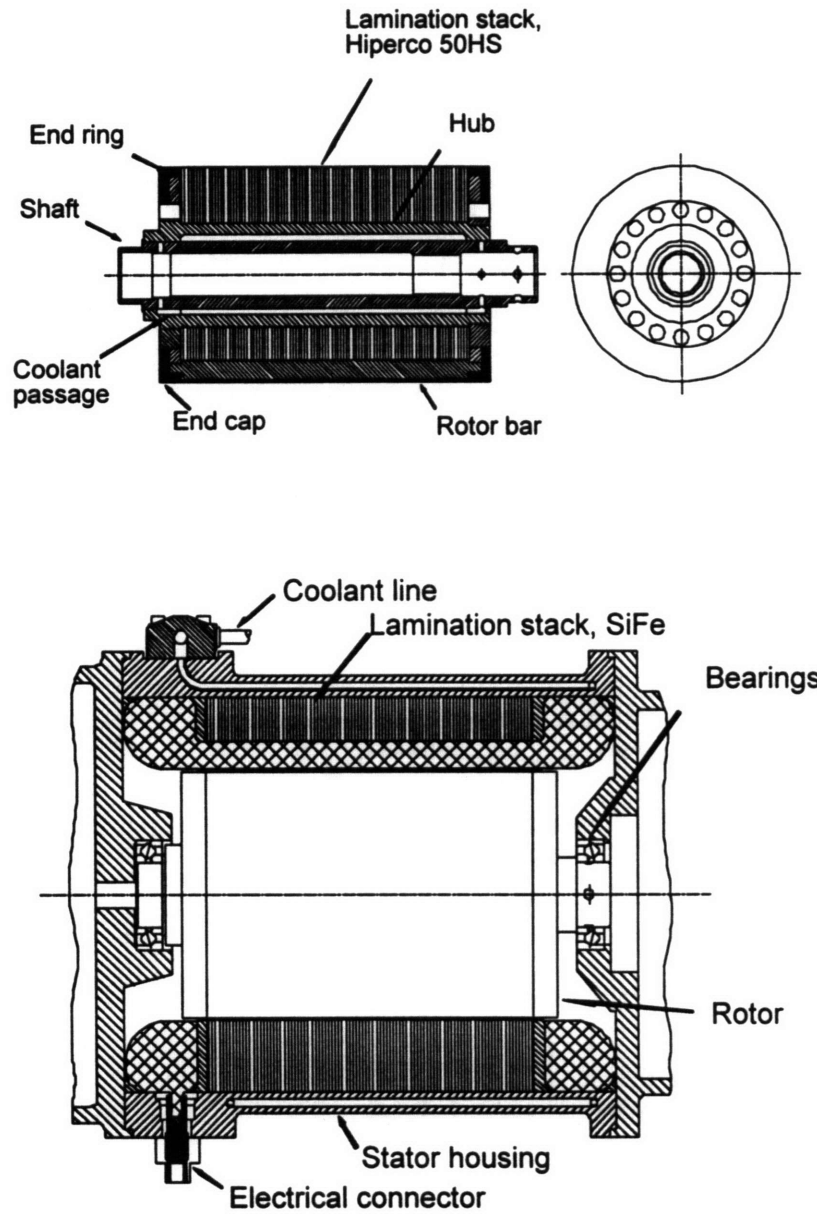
Schematic of a typical induction motor illustrating the rotor assembly (above) and the rotor and stator (below)
